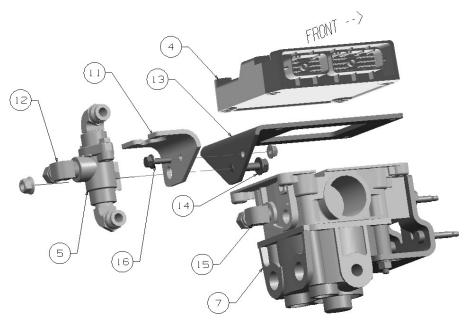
Exploded View of Valve Assembly With the Bracket Kit, In Some Cases, Item 4 May be a Plate Instead of an ABS ECU 8900083R91 Kit Items:
